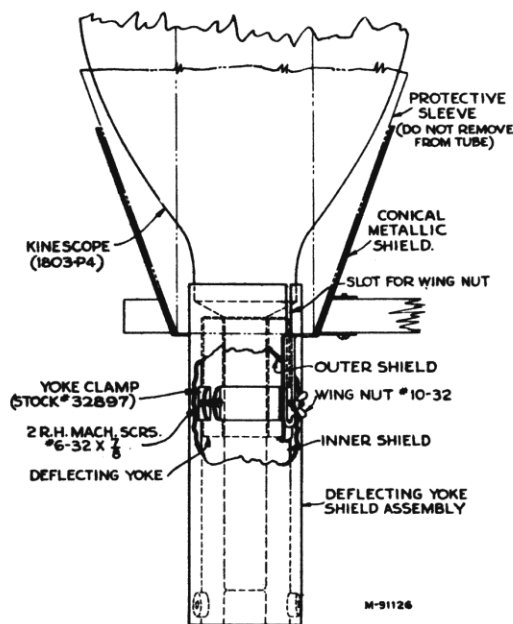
Assembly Details, Showing Kinescope and Deflecting Yoke Shielding
